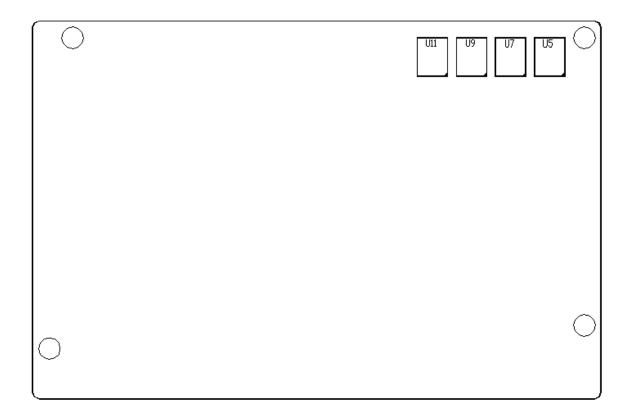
Jumpers and Connectors Location\_ Board Bottom
